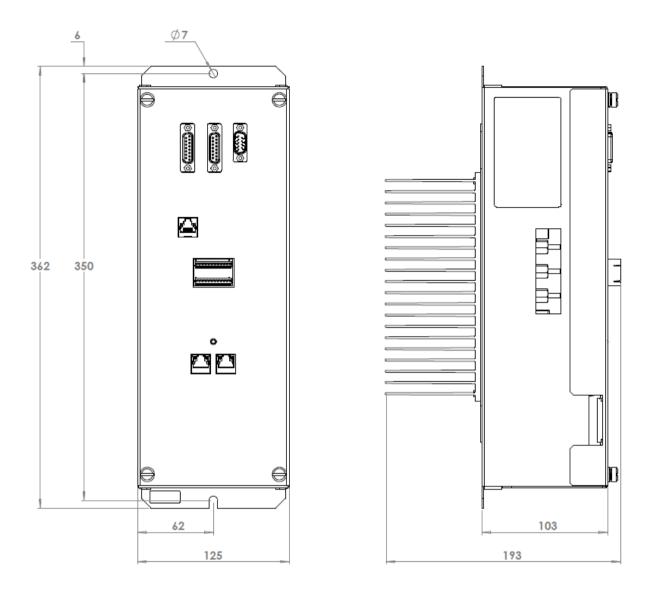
35A and 35AH Drive dimensions (with IO Interface) Duct mount
